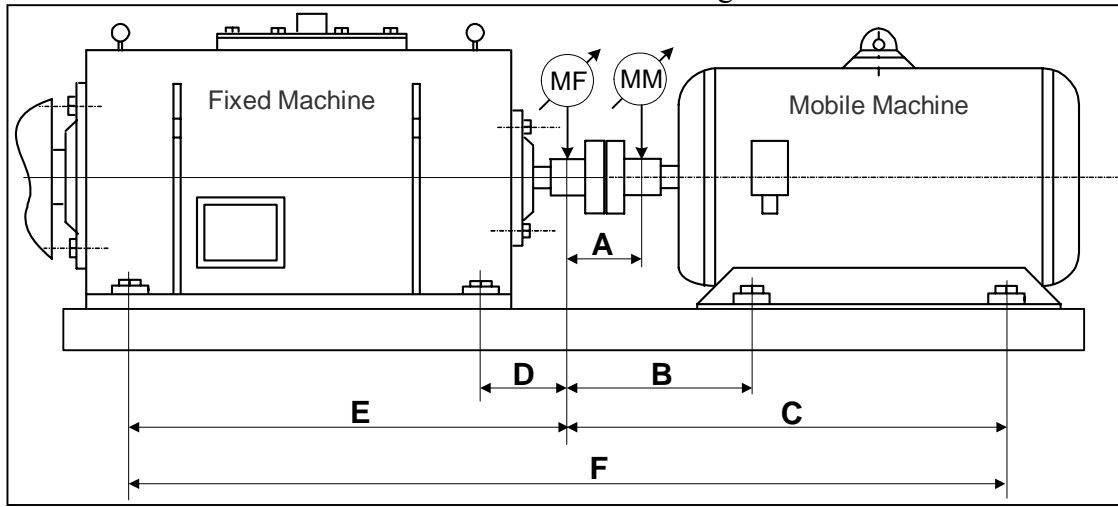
Scheme of Fixed Machine – Mobile Machine System
